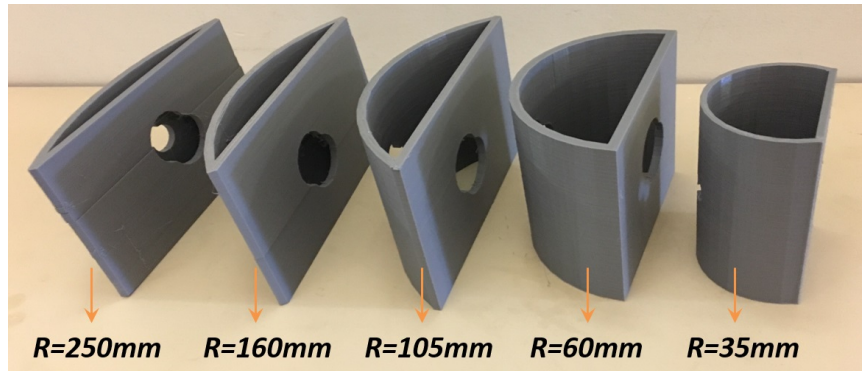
3D-printed bending fixtures in PLA are built to provide the curved surface during the measurement.
